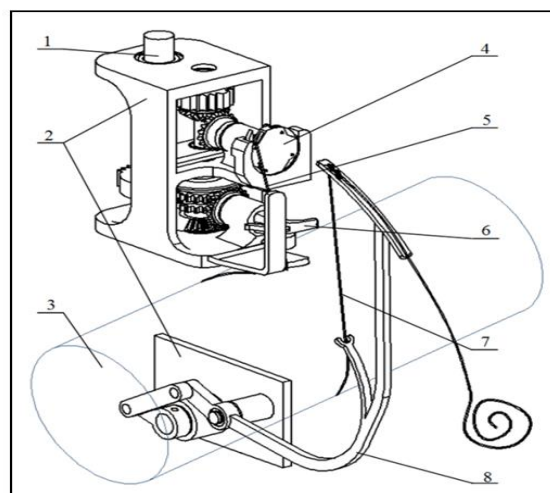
Knotting Mechanism Structure (1.Spindle, 2. Frame, 3. Bound objects, 4. Rope clamping mechanism, 5.Cutter,
